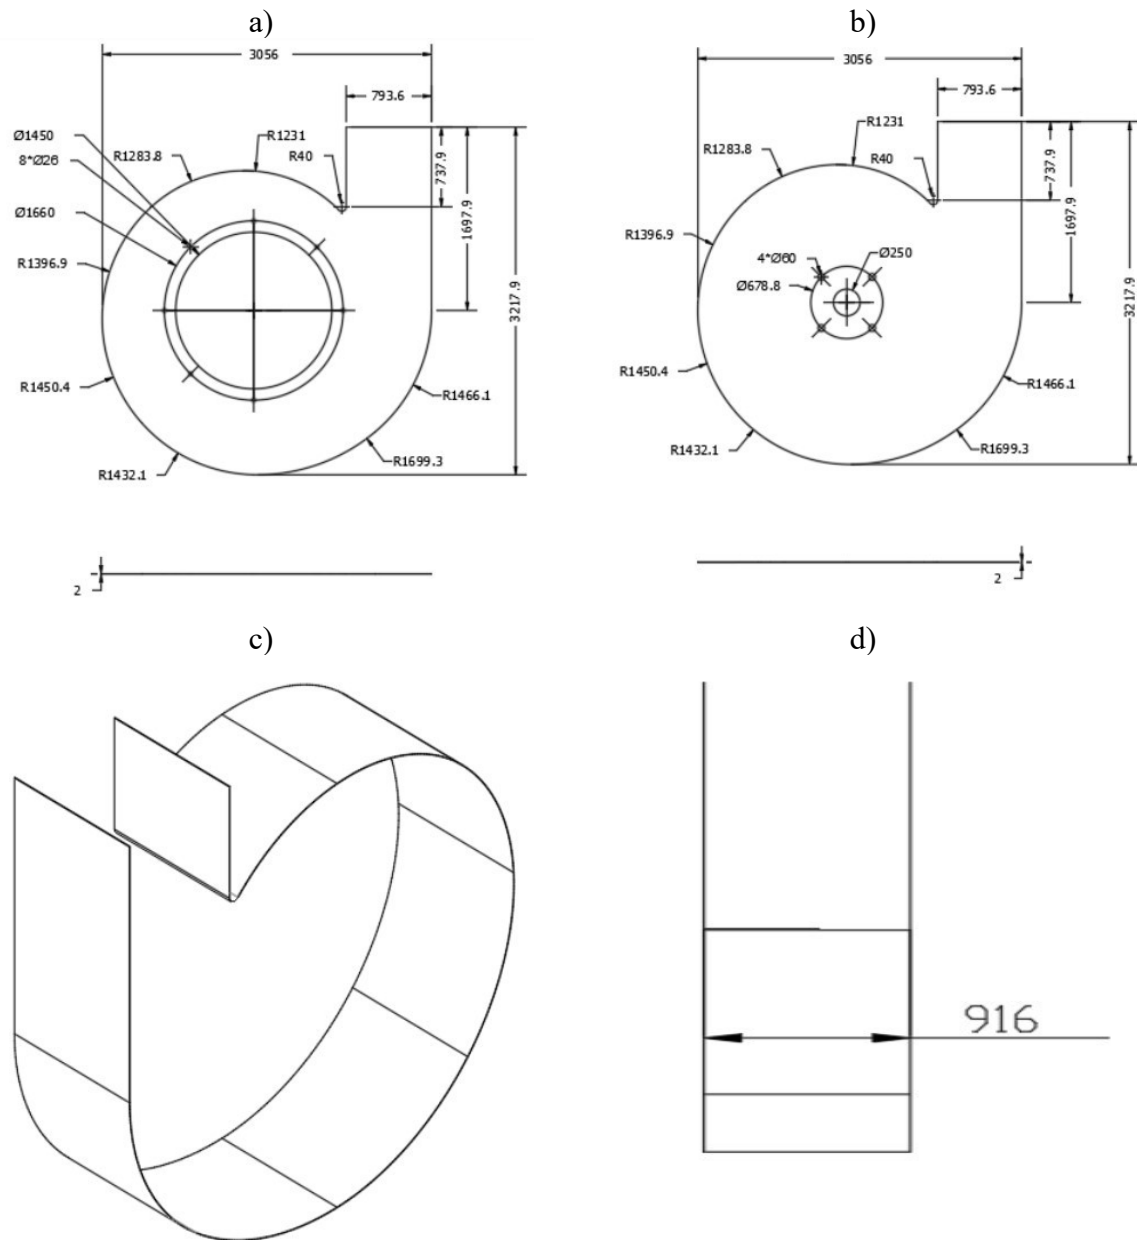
a) Housing front plate, b) Housing backplate, c) Housing connector isometric view, & d) Connector top view
